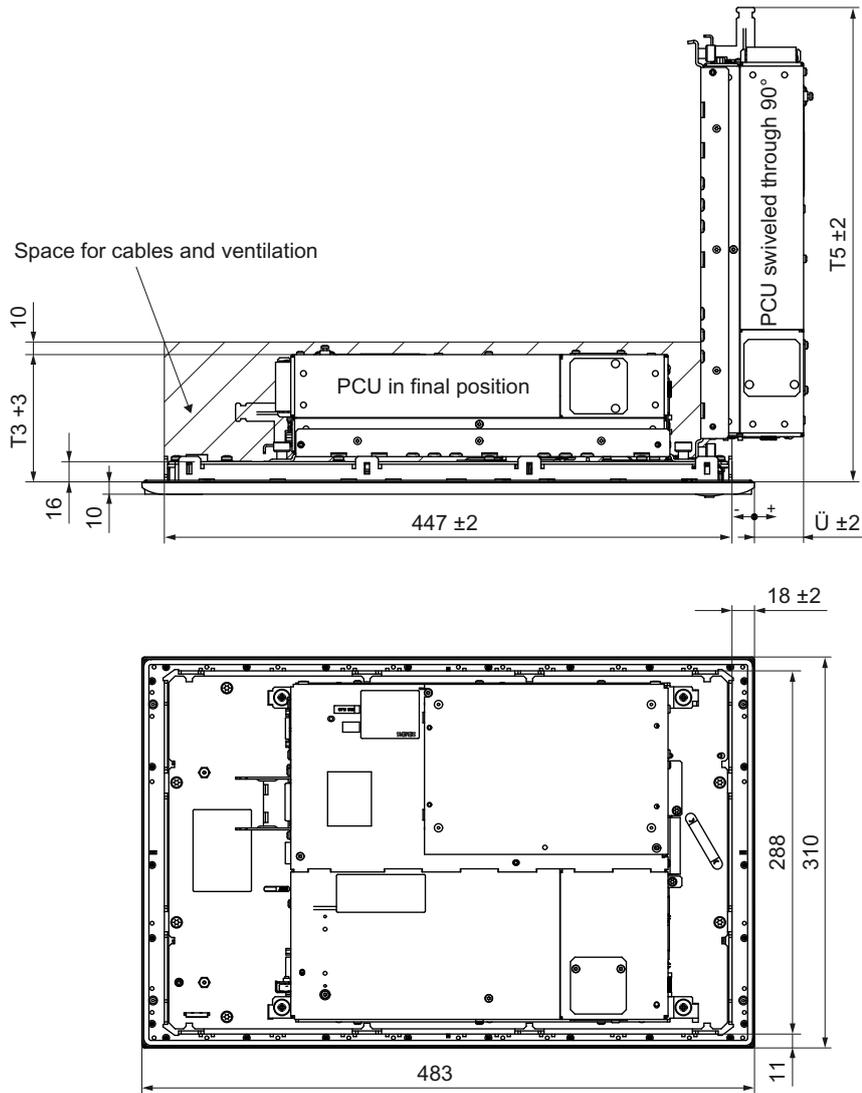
Dimension sheet for mounting the OP 010 with PCU
